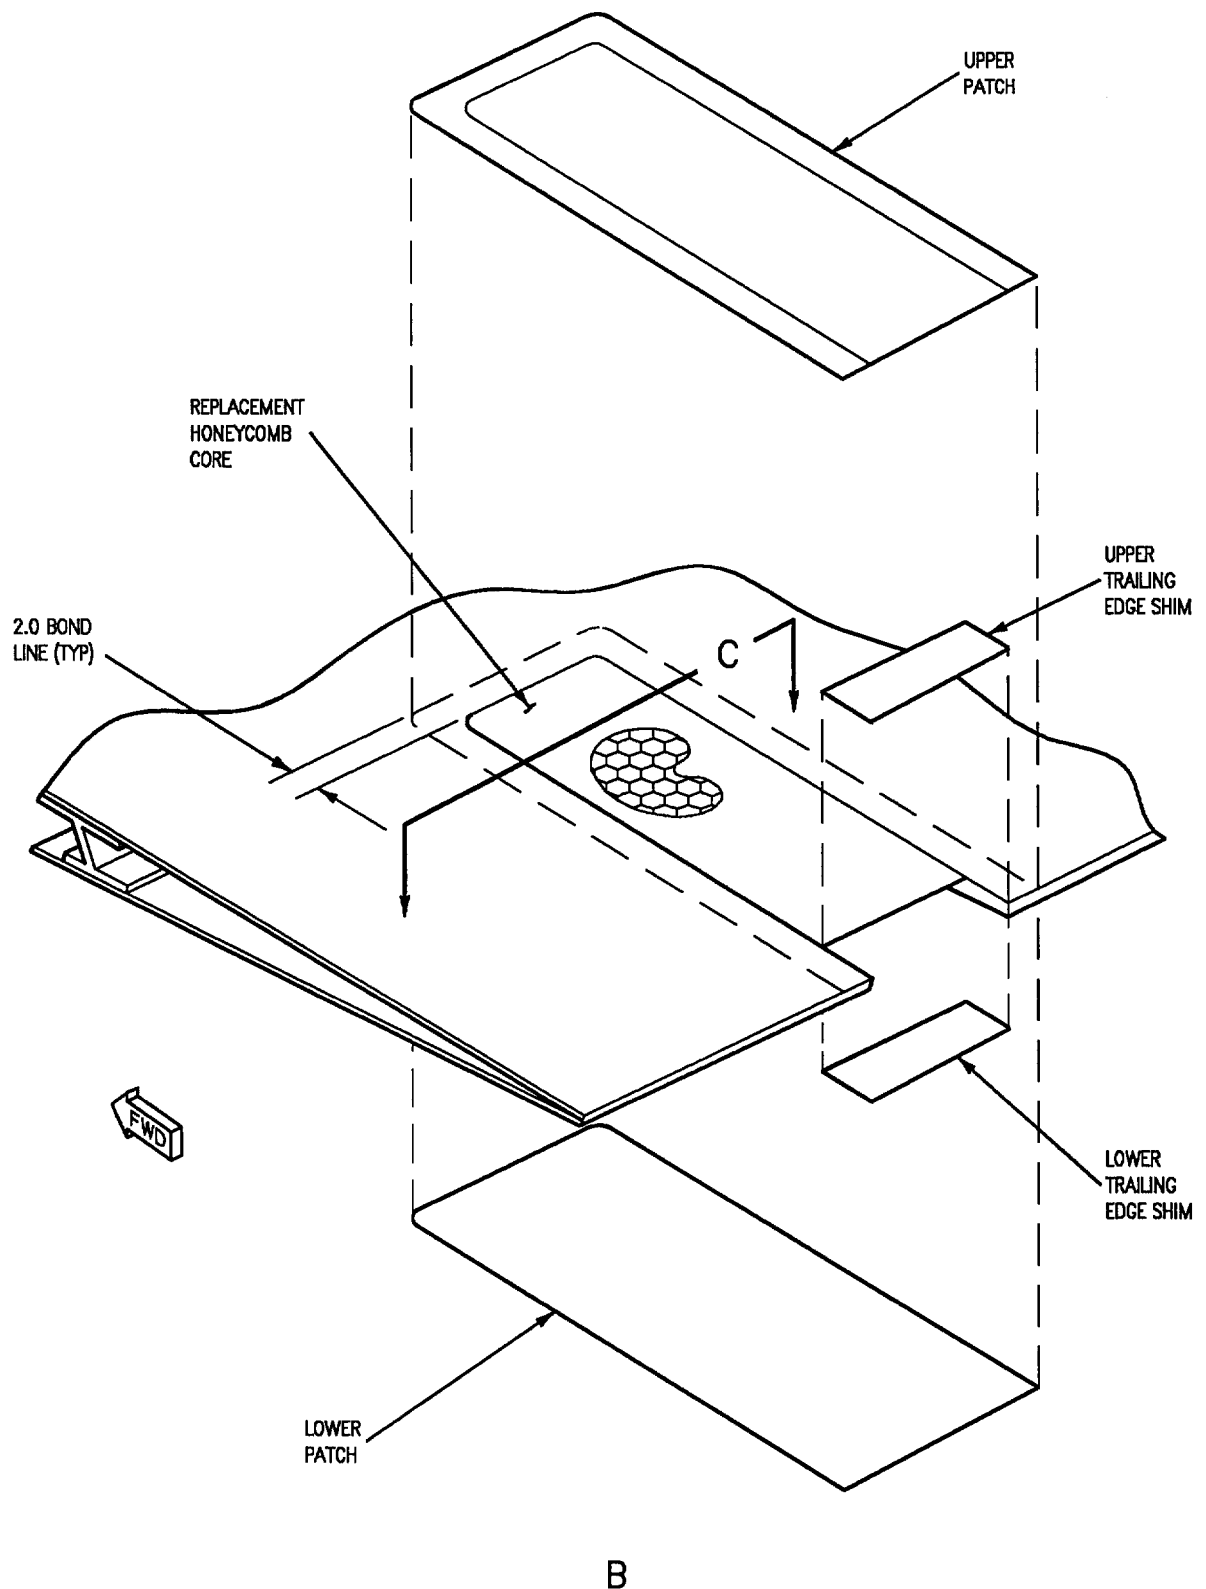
Outboard Trailing Edge Damage Repair (Sheet 2)
